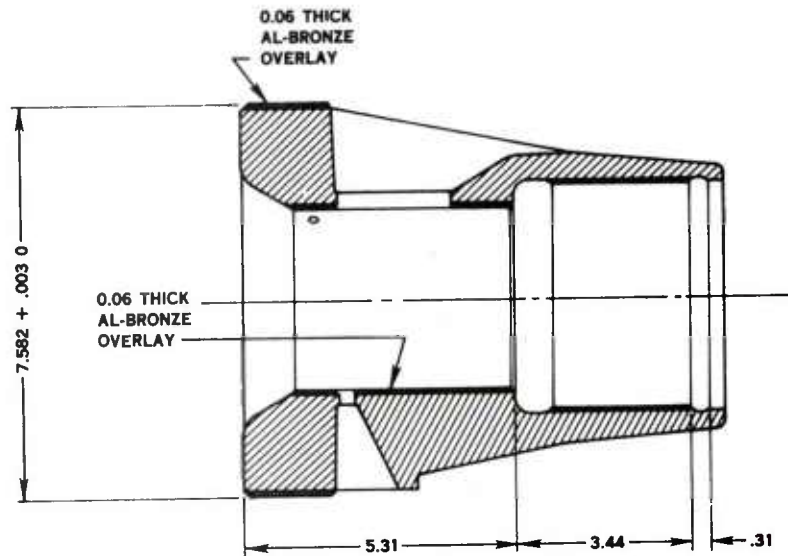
Cross Sectional View of Recoil Piston for M174 Mount, Coated with Bearing Material
